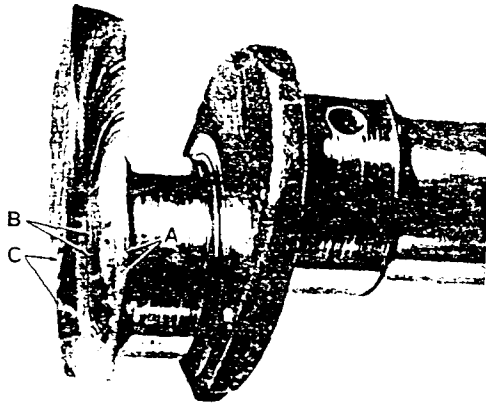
Fatigue failure of automobile crankshaft. A—start of fracture in fillet: B—“beach marks” typical of crack progress under intermittent operation: C—line of final sudden failure. (Courtesy Lessells and Associates, Inc., Waltham, Mass.)
